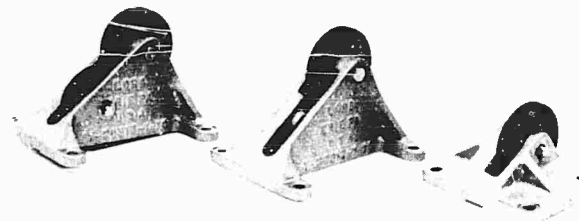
Sheave-bracket assemblies for routing cables from spring-damper assemblies to spectrometer instrument package
